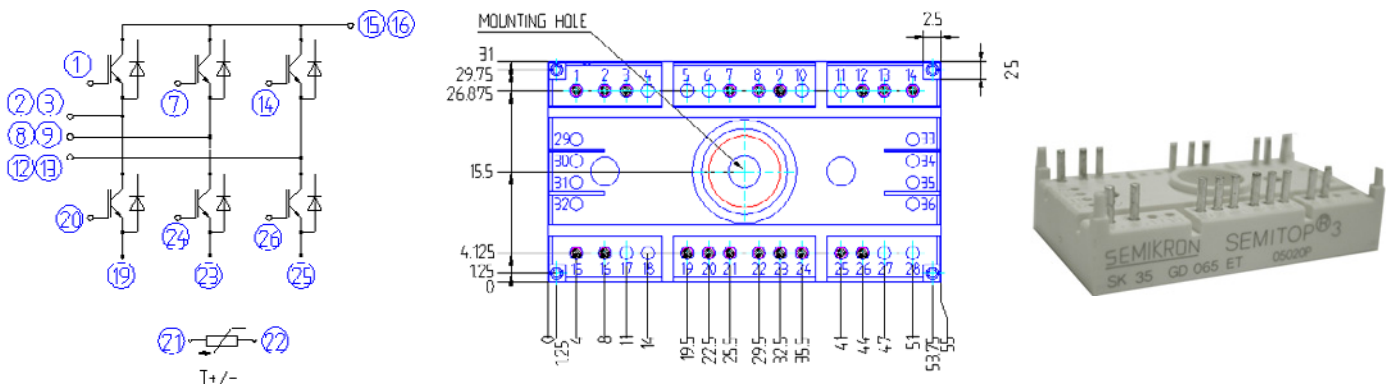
Electrical circuit, outline dimensions and housing of SK 35 GD 065ET
